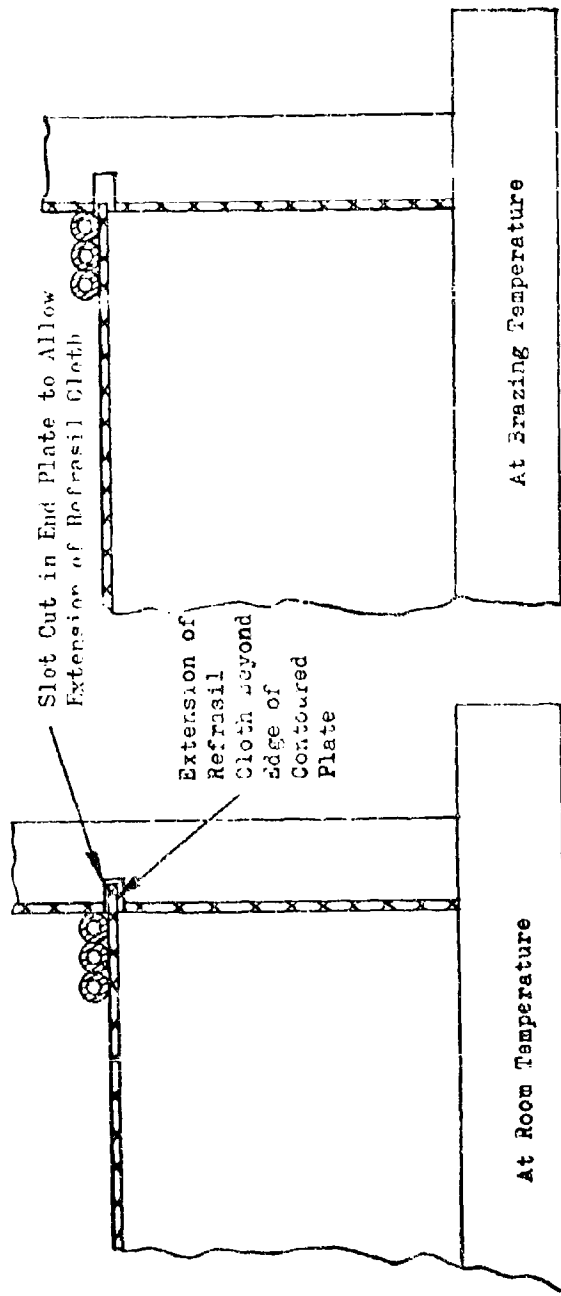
Cross-Sectional Views of Tube Wall and Braze Fixture Taken at Throat Area Showing Fixture Change That Was a Solution to The Outboard Tube Lateral Misalignment Problem
